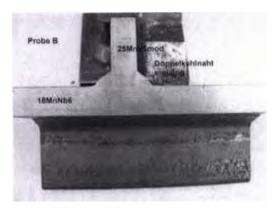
Profile of 25MnV5mod and 18MnNb6 single-layered, double-fillet welds
